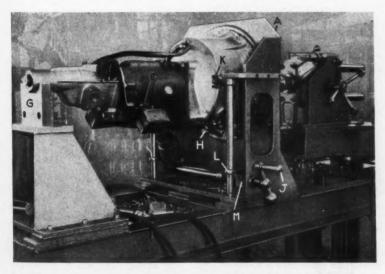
Close-up view of the angle-plate mounting for the gearbox unit on the final assembly fixture. Swinging clamps are moved to engage the flange of the bell-housing by turning the crank-handle at the front of the fixture
